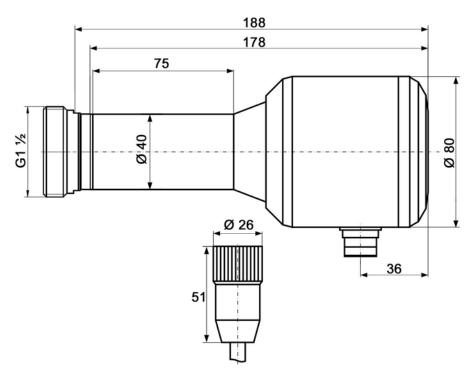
Dimensional drawing compact flame scanner F200K V, F200K Ex-II V
